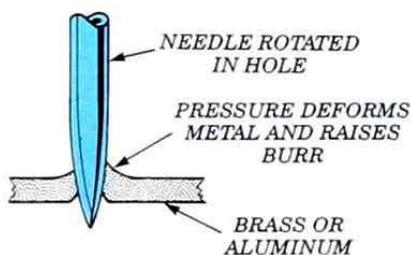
The first step in making a liquid lens is to form a perfectly circular hole with a raised edge in a thin metal sheet.
